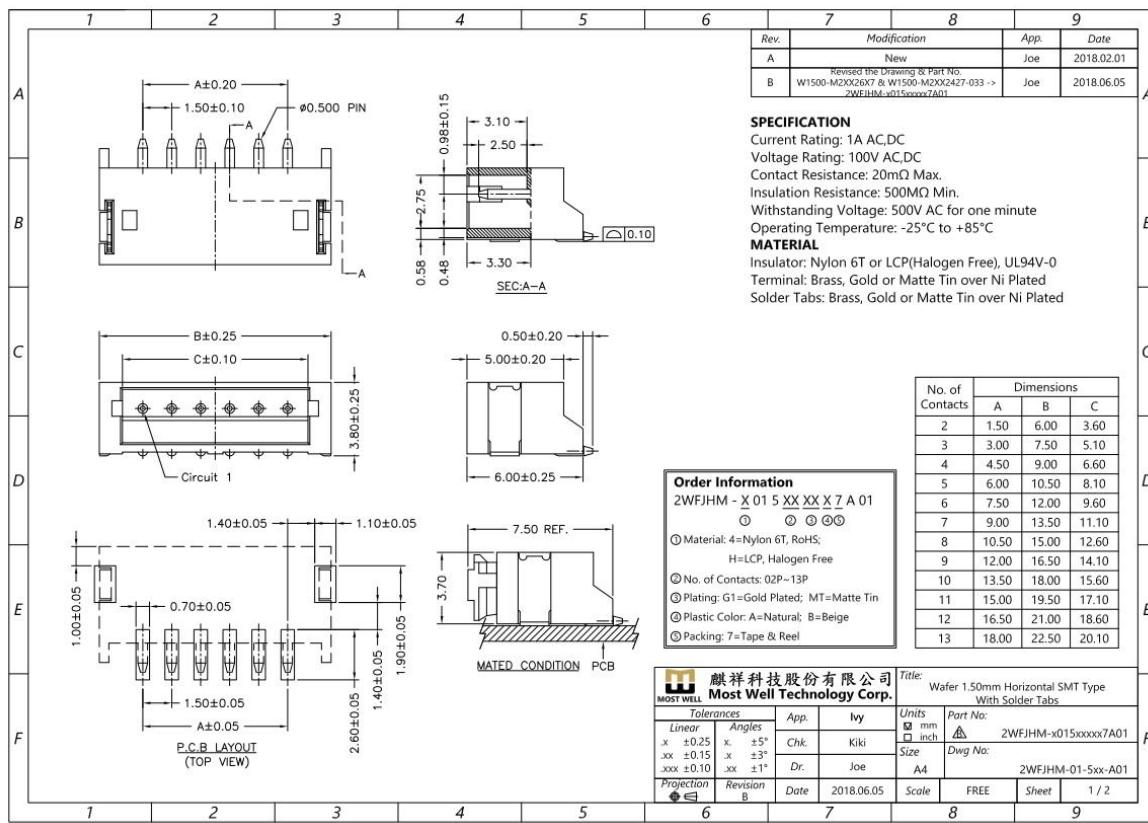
Wire to Board SMD 1\*13P Connector Drawing
